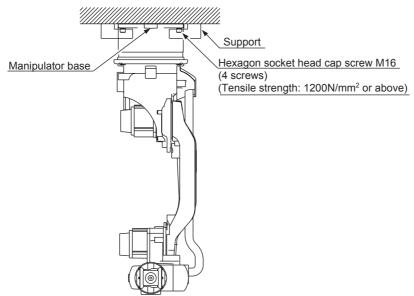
When Using Ceiling- and Wall-Mounted Types
